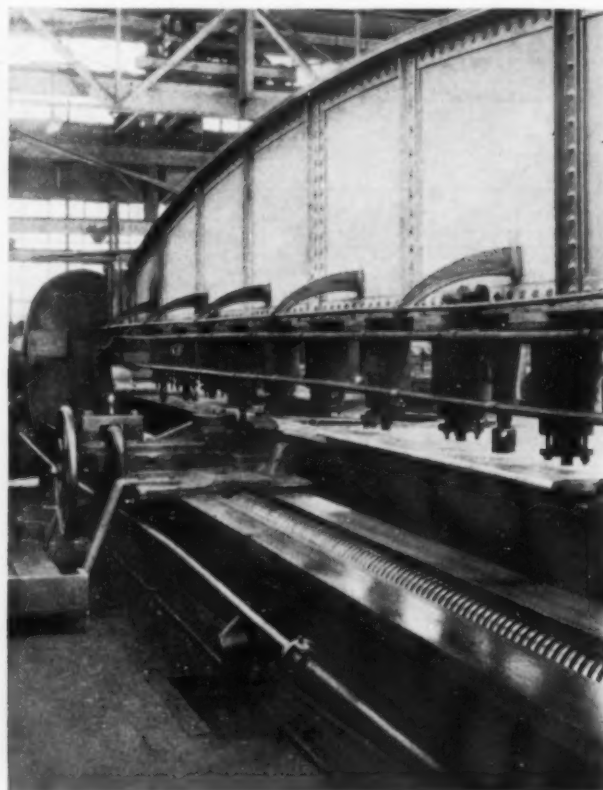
The edge planer is an extremely accurate tool for trimming the shell plates to the exact size required
